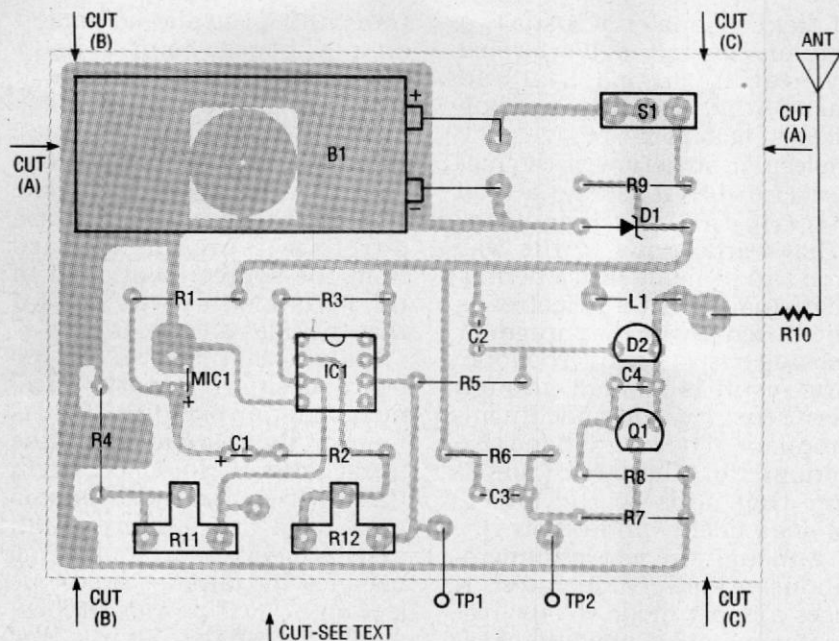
PARTS-PLACEMENT DIAGRAM. There is room on the board for the 9-volt battery holder if you are installing the board in a large enough case.
